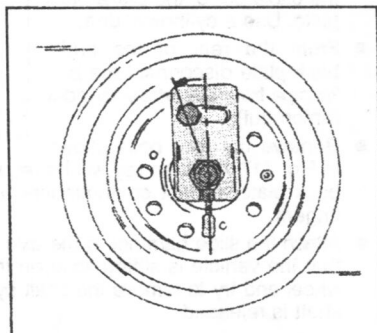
Move the wheel bolt in the direction of the arrow (R.H. thread).
